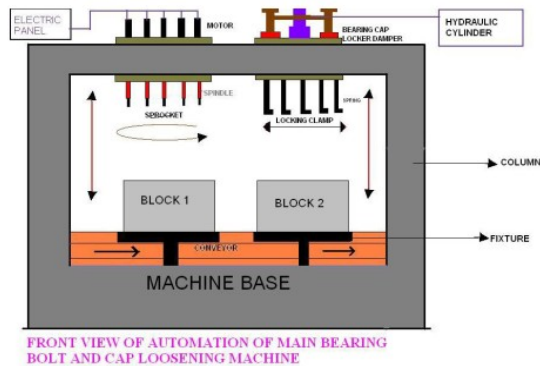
front view of automation of main bearing bolt and cap loosening machine[12]
